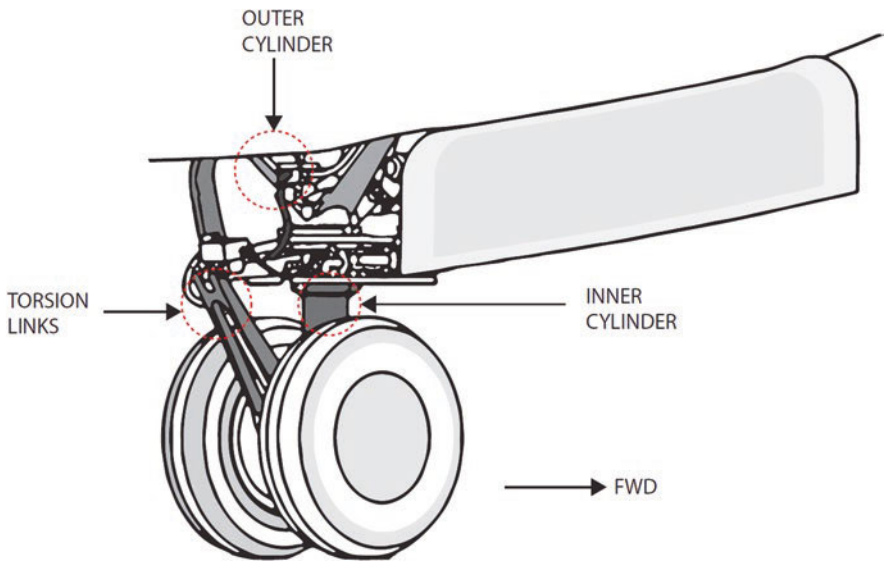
Torque connection at the front landing gear strut of Boeing 737 aircraft
